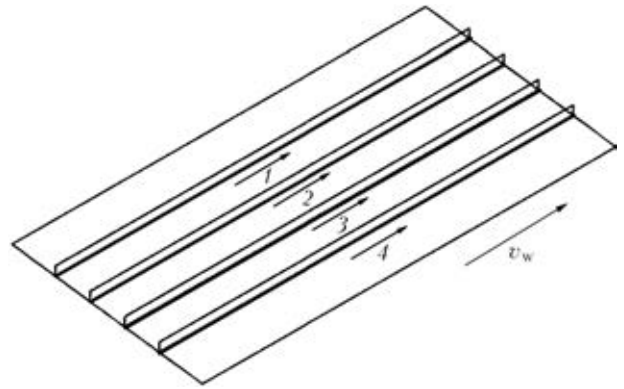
Scheme of weld performance sequence in modelling of welding of stringer panel
